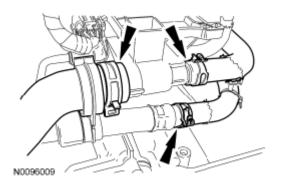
Locating Coolant Outlet Heater Hoses Courtesy of FORD MOTOR CO.
